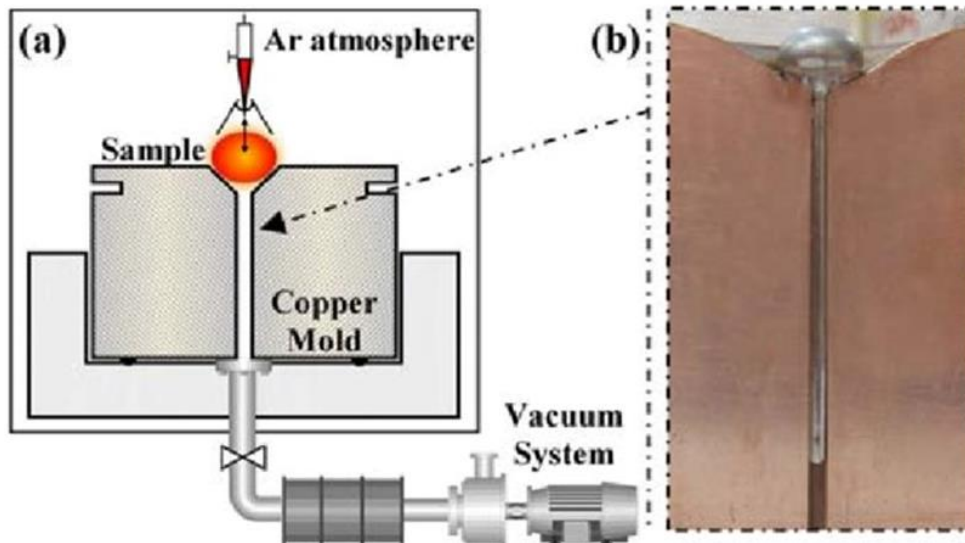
10. (a) Schematic of suction casting process and (b) a sample in copper mould [83].
